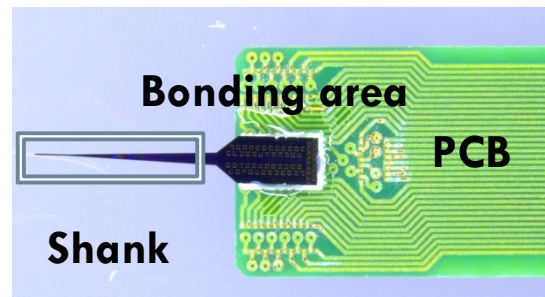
PROBE GLUED ON THE PCB USING EPOXY GLUE, BEFORE THE WIRE-BONDING
